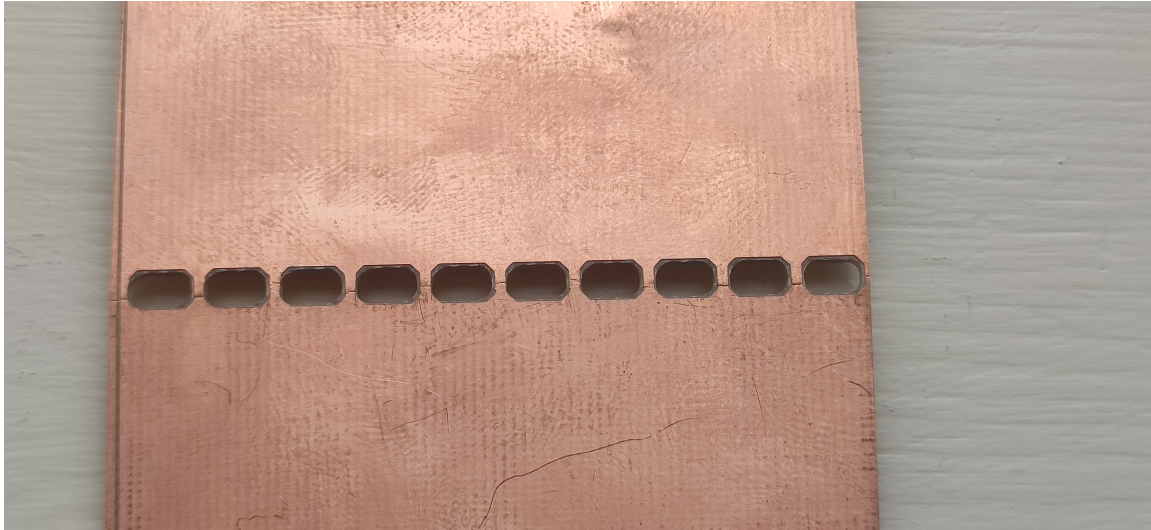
Bottom side of the mechanical test specimen "Eco5" after the three-point-bending test.
